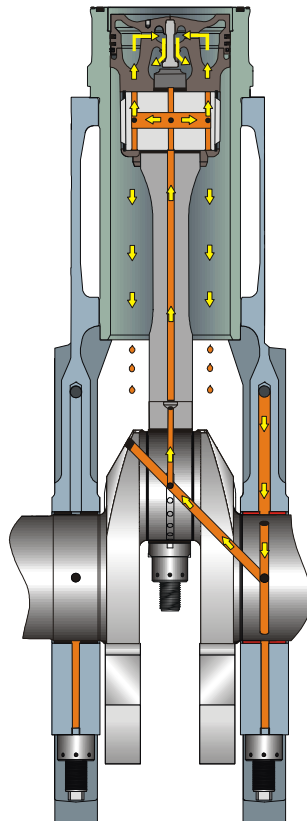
The lubricating oil flow in connecting rod and piston (커넥팅 로드 및 피스톤내의 윤활유 흐름)
